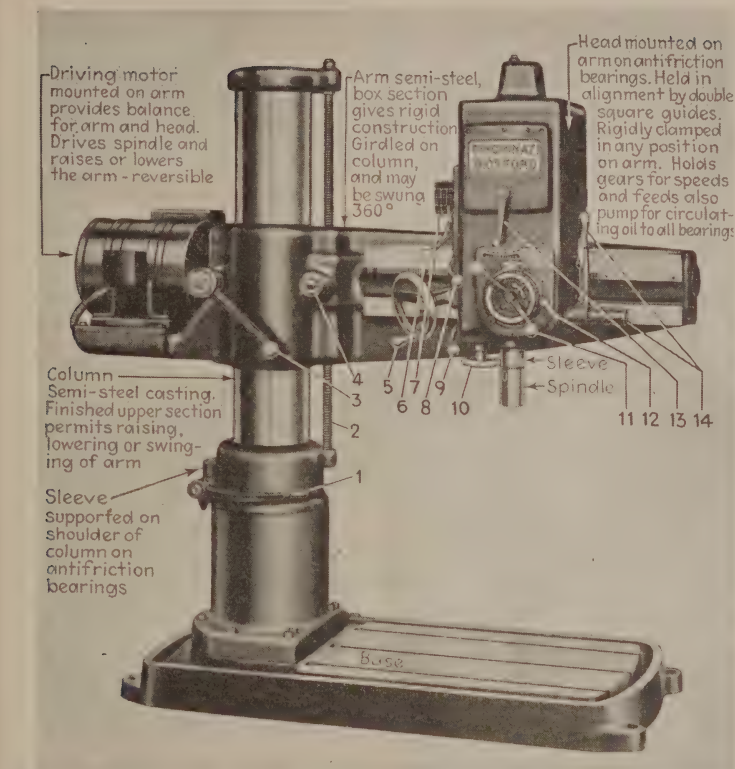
High-speed super-service all-g geared radial drill. (Courtesy of The Cincinnati-Bickford Tool Company.)
